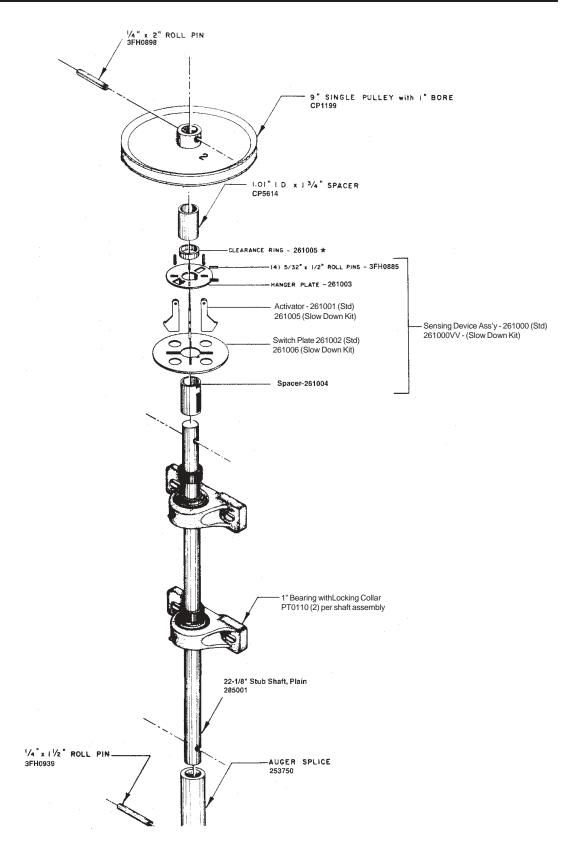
Stub Auger Assembly No. 2 (280002)
